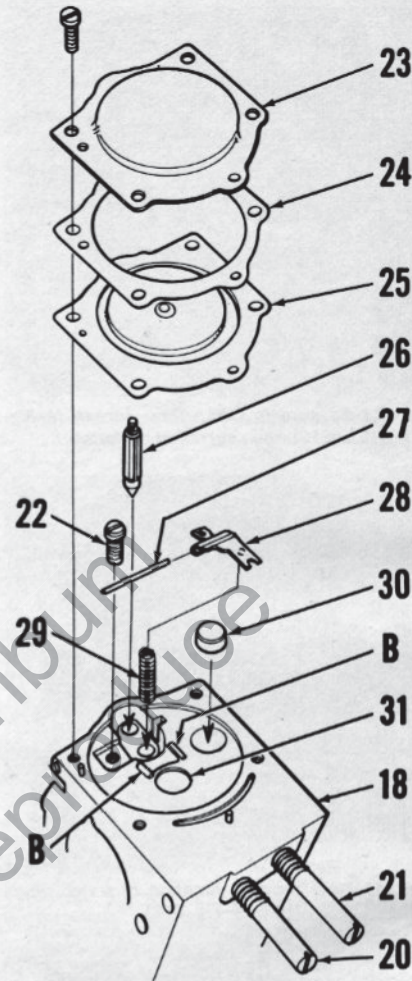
Exploded view of metering diaphragm assembly used on Walbro model SDC. Refer to Fig. S20 for other carburetor components.
